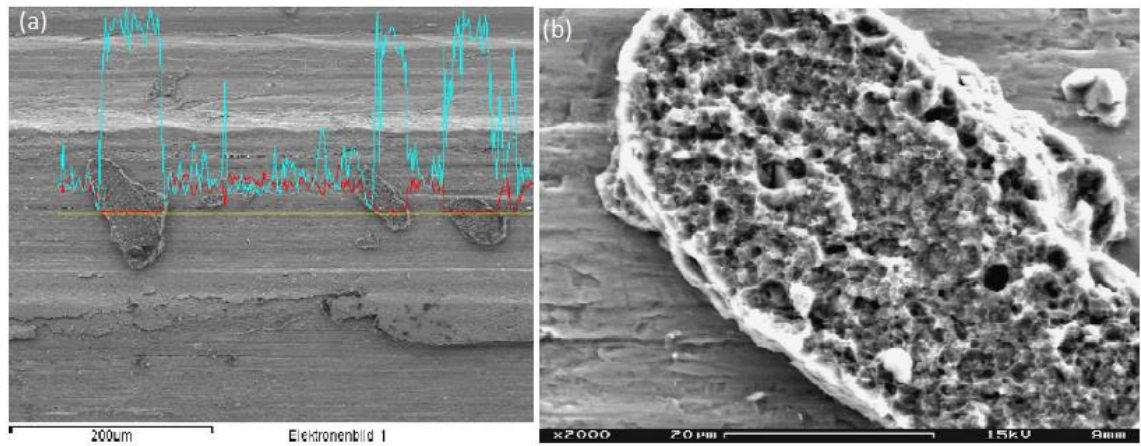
Fracture surface (titanium side) with adhesive aluminium spots; EDX colors: red (dark) →titanium, blue (light) →aluminium. (For interpretation of the references to color in this figure legend, the reader is referred to the web version of the article) [36].
